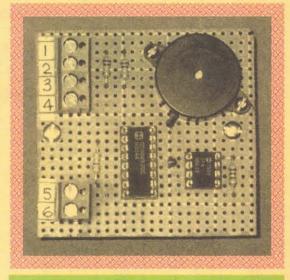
CONTROL CIRCUIT MODULE — This is assembled on the project board, and holds all the electronic components, including IC1, IC2, and the circular buzzer. The integrated circuits are installed in wire-wrap sockets. Component location is not critical.
